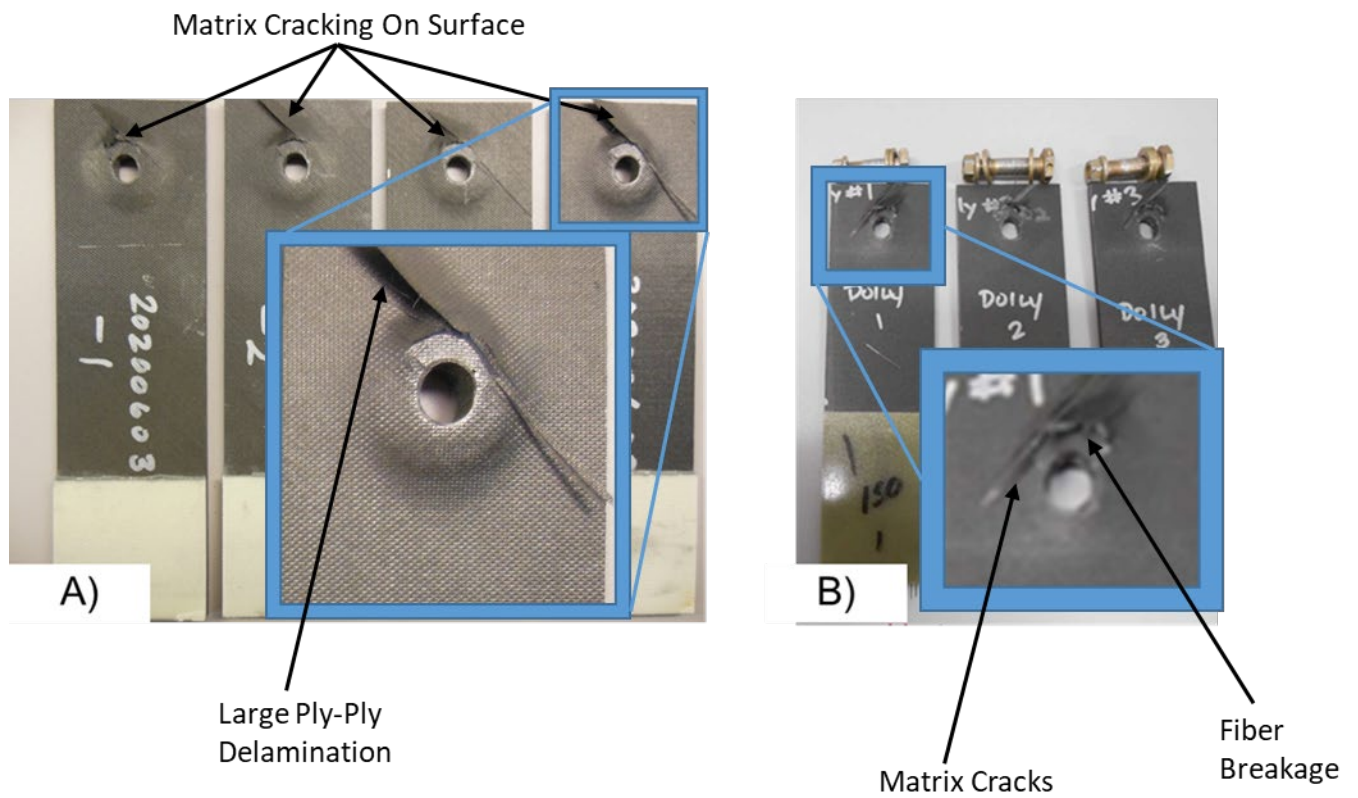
a) 3K Tow Circle Insert Bearing Failure, b) 3K Tow Ellipse Insert Bearing Failure
